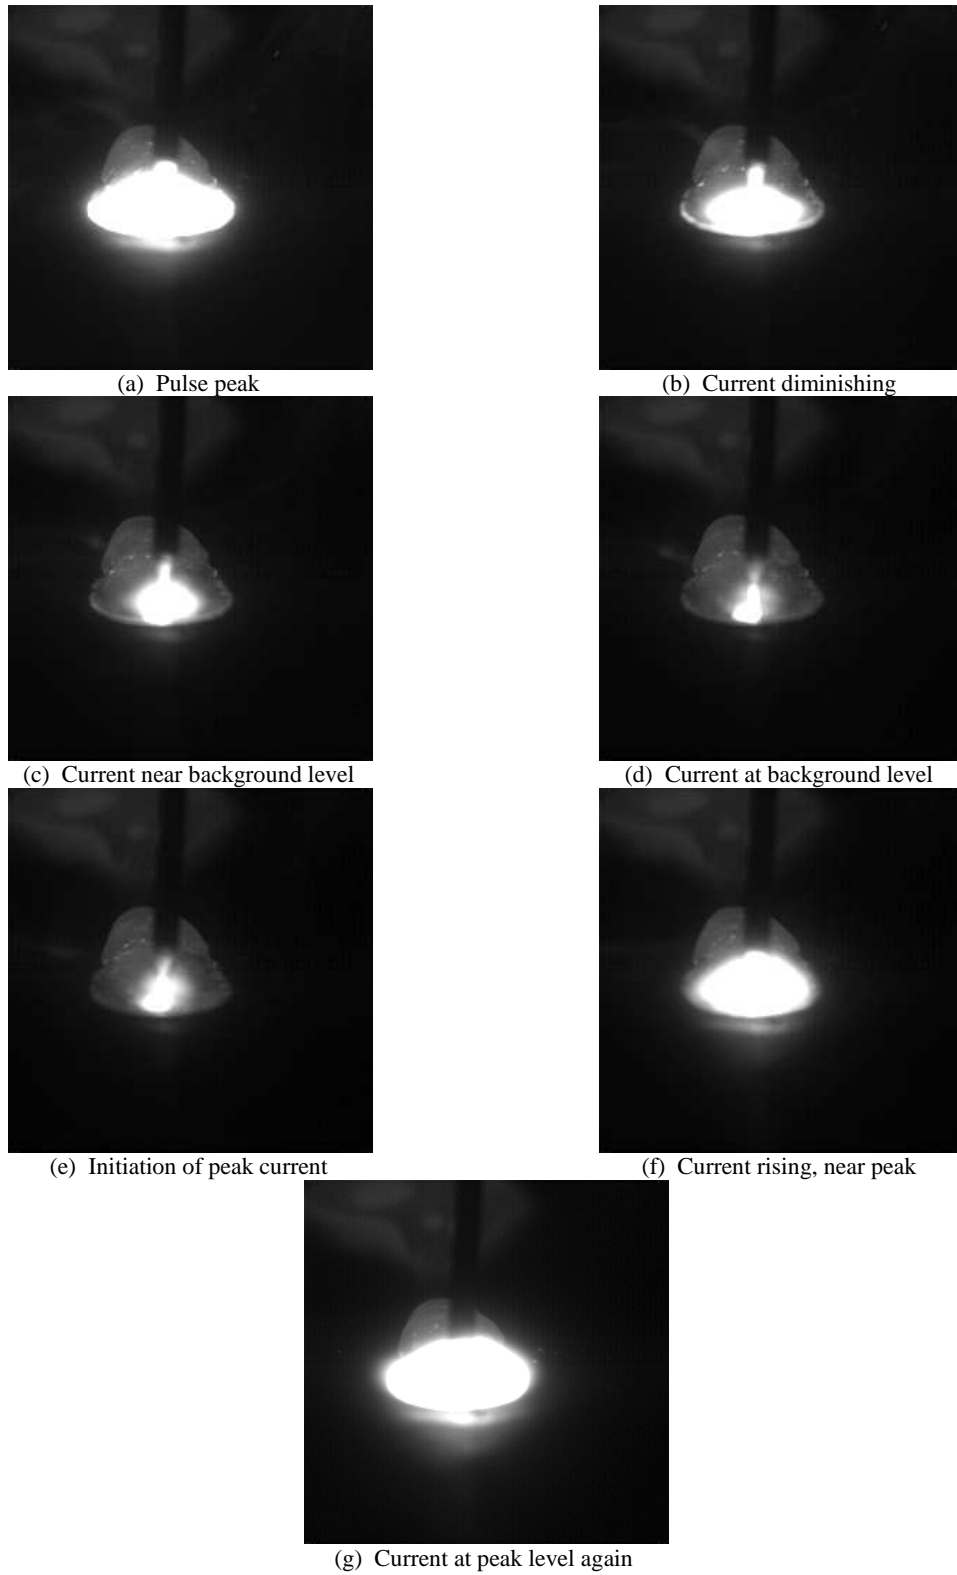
Sequence of HSV Images Showing the Predominant Direction of Weld Pool Fluid Flow at the Surface to be Rearward
